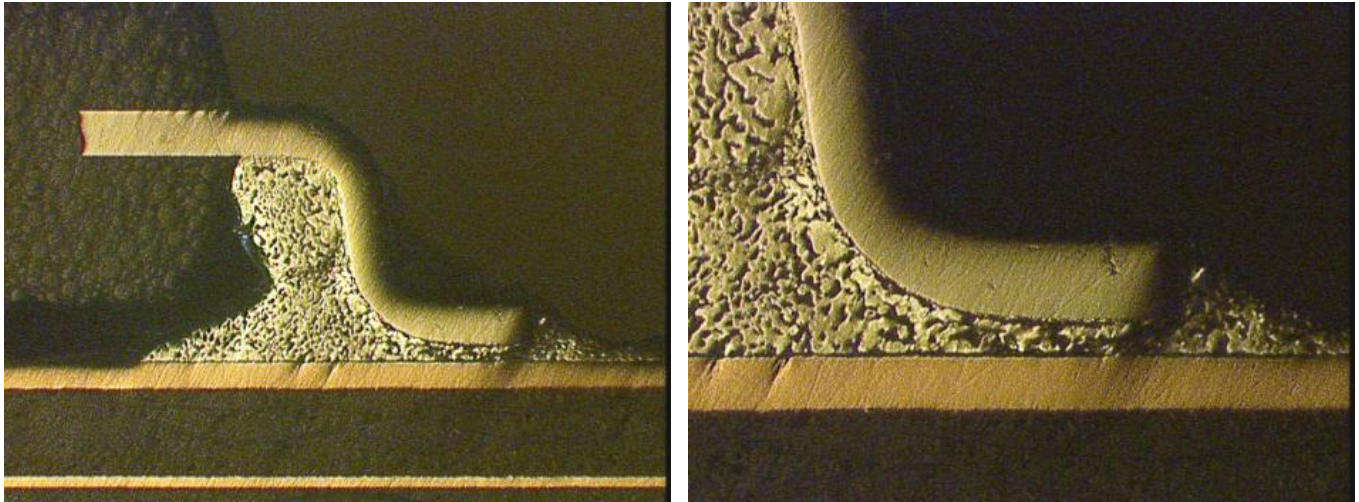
Reworked TSOP-50 Solder Joints, Board 47, Component U29, Initially SAC305/Sn, 1 rework SnPb/Sn, Failed @ 1010 Cycles
